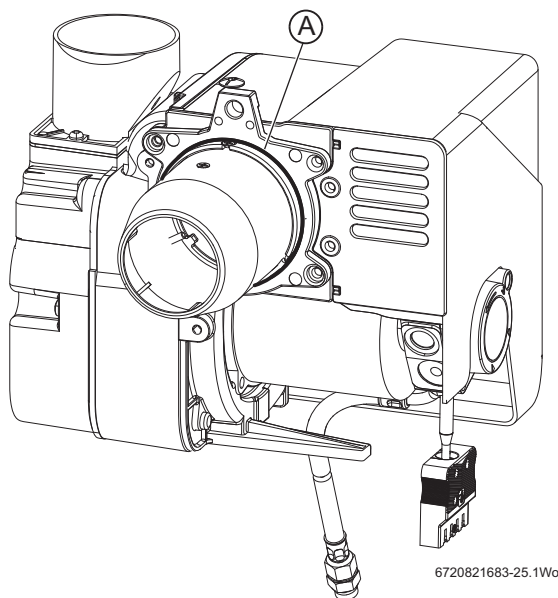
18/25 and 25/32 Burner O-ring seal shown
